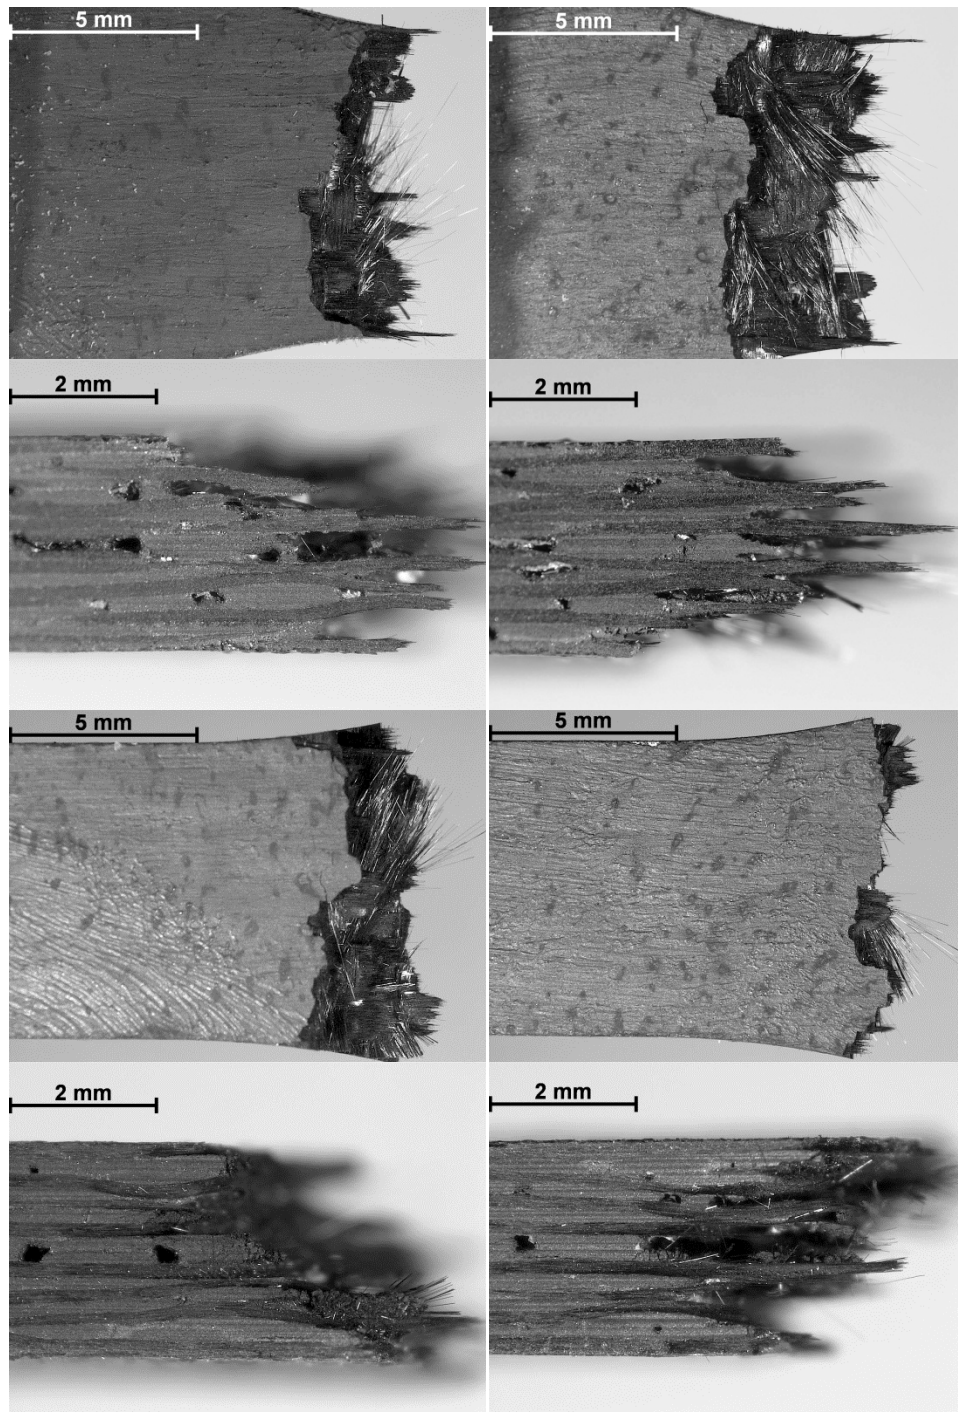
Fracture surfaces obtained in tensile test of virgin C/SiC specimen (Plate 12012, Specimen 6)
